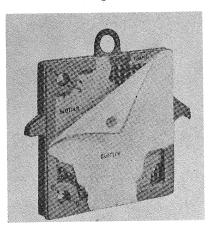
Assembly of One Filter-press Plate AND ONE FILTER-PRESS FRAME, SHOWING FORMATION OF OIL CHAMBERS BETWEEN FILTER PAPERS.
